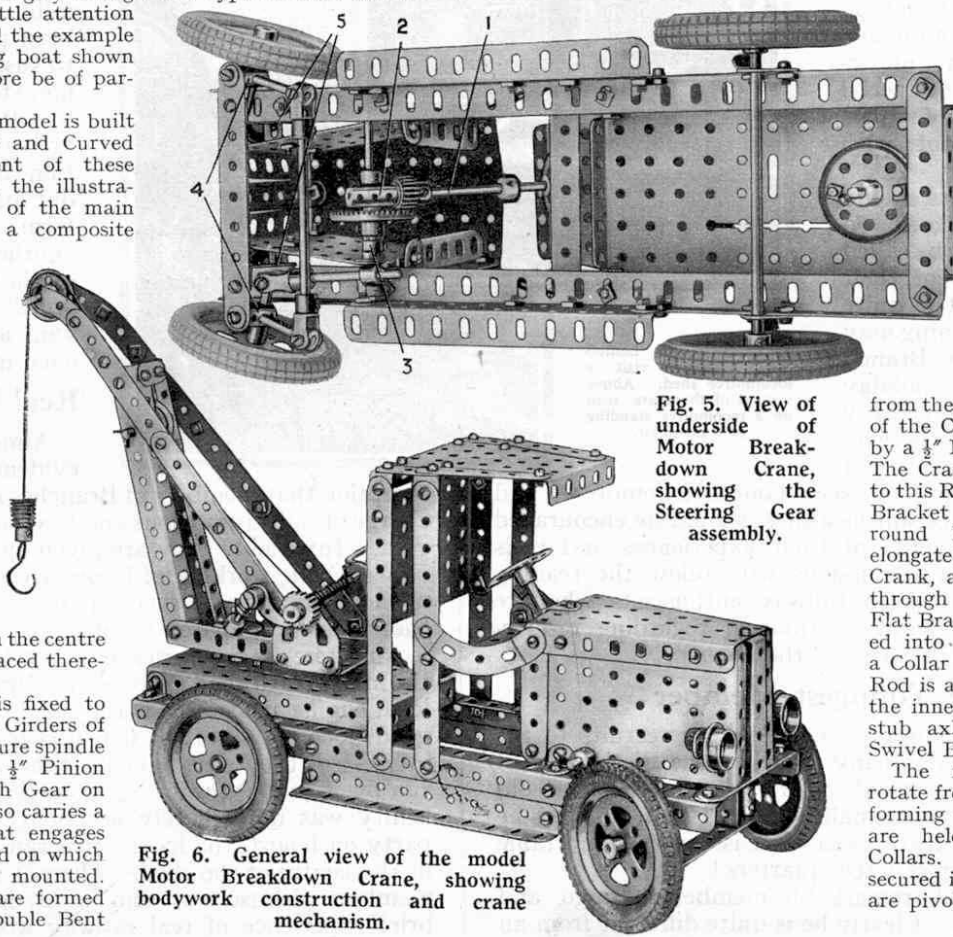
View of underside of Motor Breakdown Crane, showing the Steering Gear assembly.
